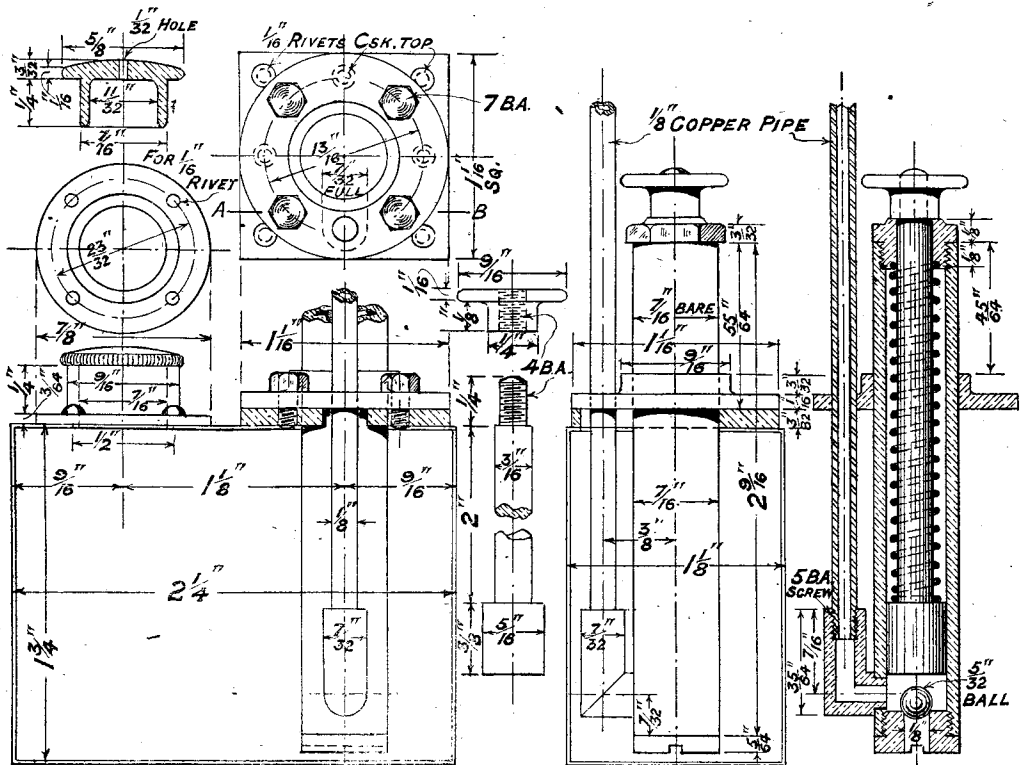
Arrangement and details of oil feed pump and filler in oil reservoir tank for "Midge" loco. (full size).
